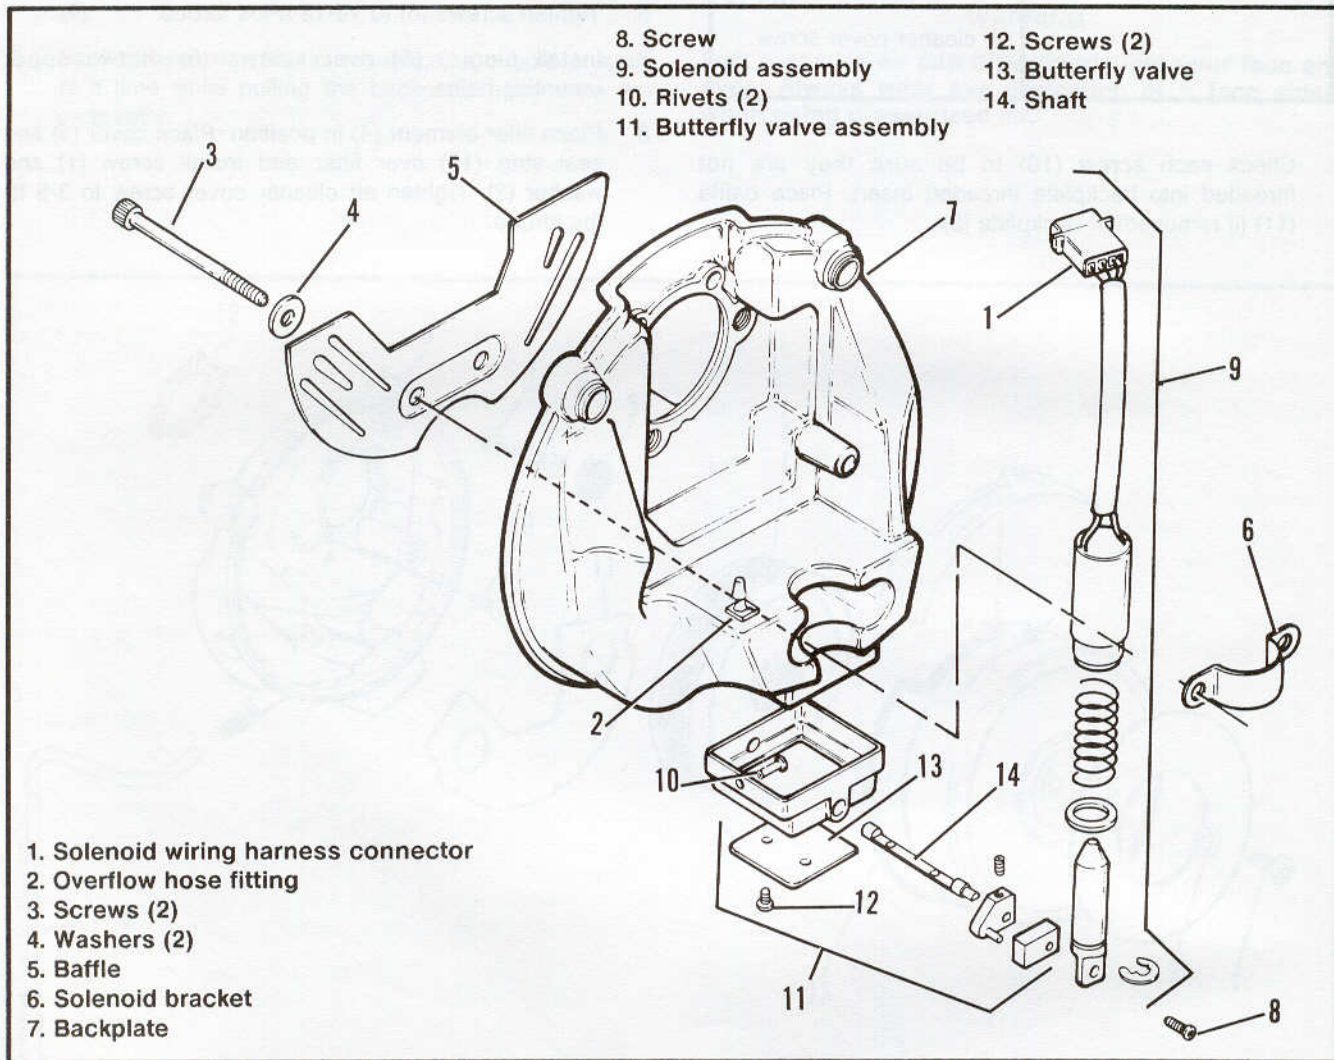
Air Cleaner Backplate Assembly - 1992 California Models
